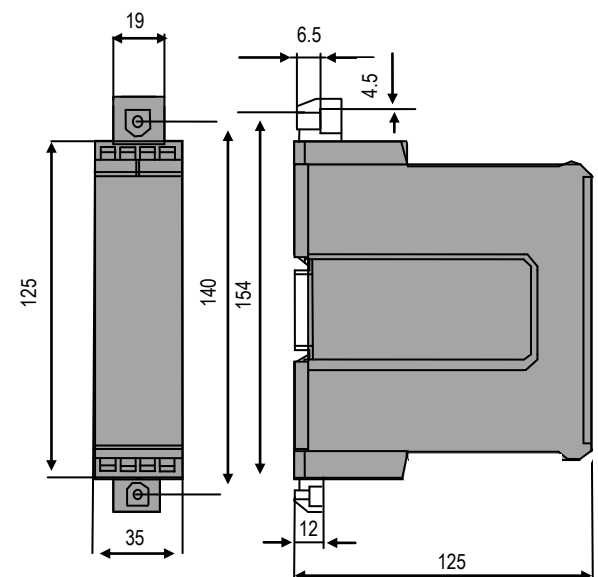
Transducer with the screw hole brackets pulled out for wall mounting
